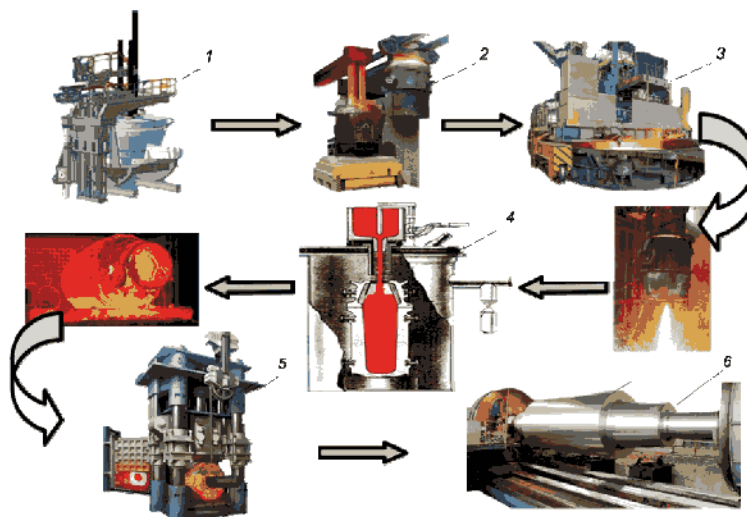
Scheme of technological manufacturing of a roll for a rolling mill from a forging ingot with a mass of 415 tons : 1 – electric arc furnace (EAF), 2 – ladle-furnace unit (LFU), 3 – degasser, 4 – vacuum pouring of ingot, 5 – forging press, 6 – roll for the rolling mill
